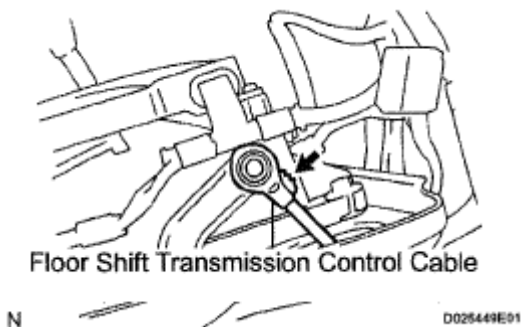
Locating Floor Shift Transmission Control Cable End To Floor Shift Assembly
